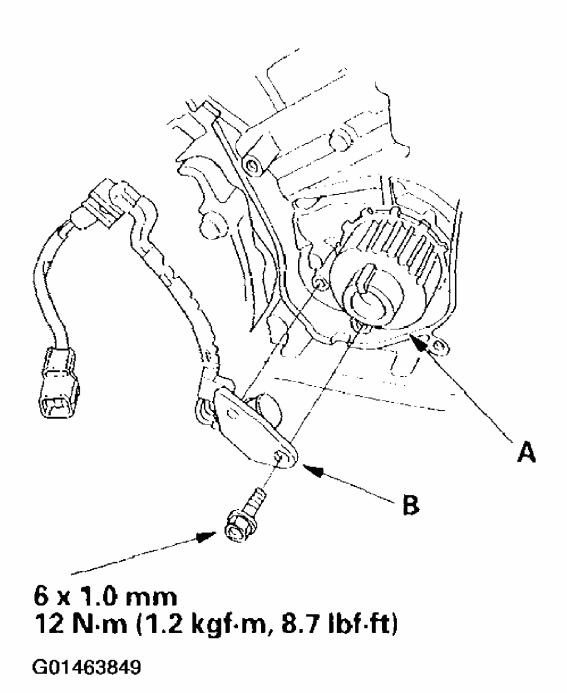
Installing The Timing Belt Drive Pulley & The Crankshaft Position
